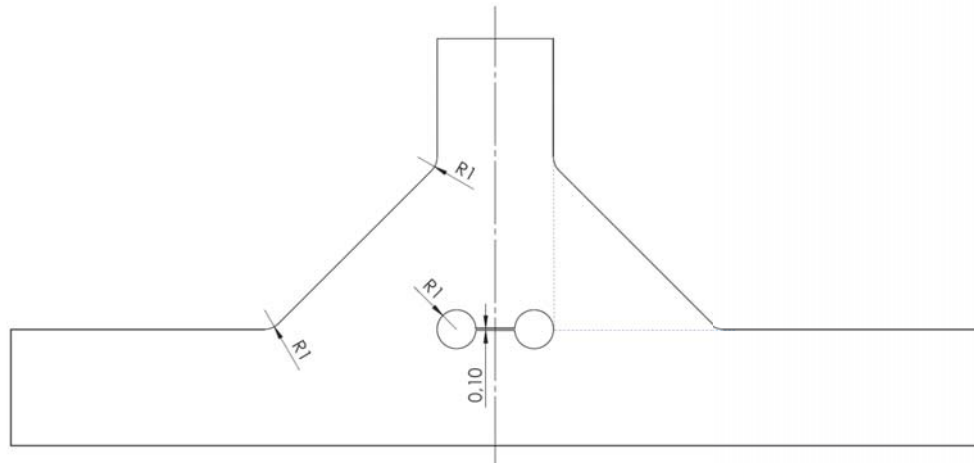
Reference radii in the weld toe and root of the longitudinal section of the weld.
